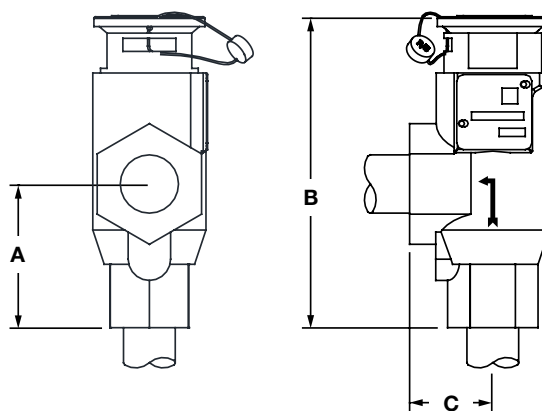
CSR & CSRH Safety Relief Valves Dimensional Diagram
